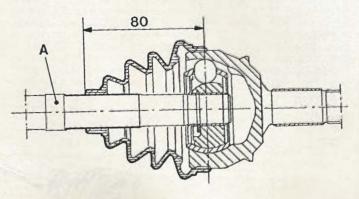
Correct position of later type modified outboard joint gaiter fitted to early type driveshaft (Sec 7)
